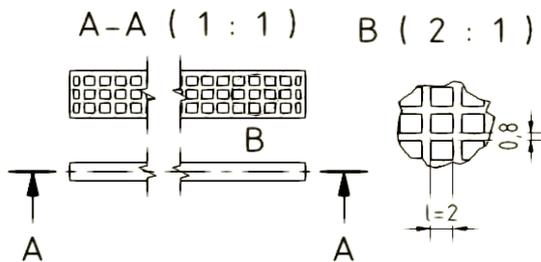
Specimen with square shape and 2 mm dimension of inner structure
